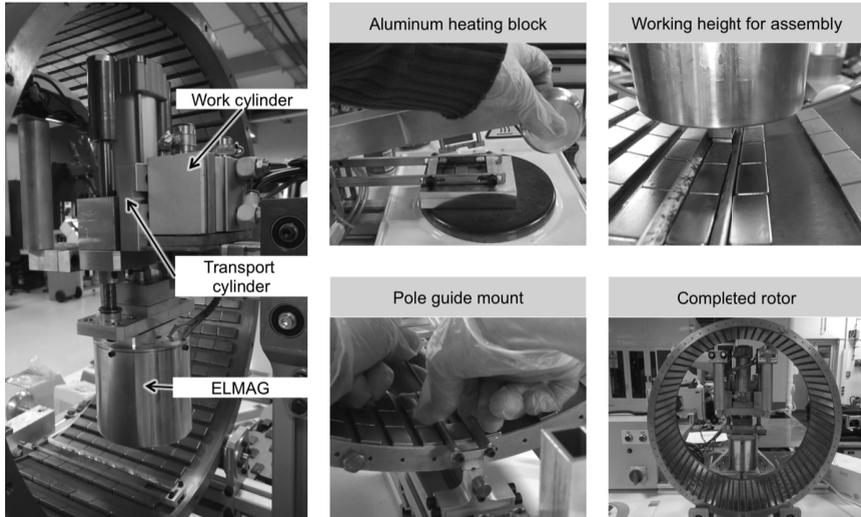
Fixture details for the assembly process with the workplace for the outer rotor.
